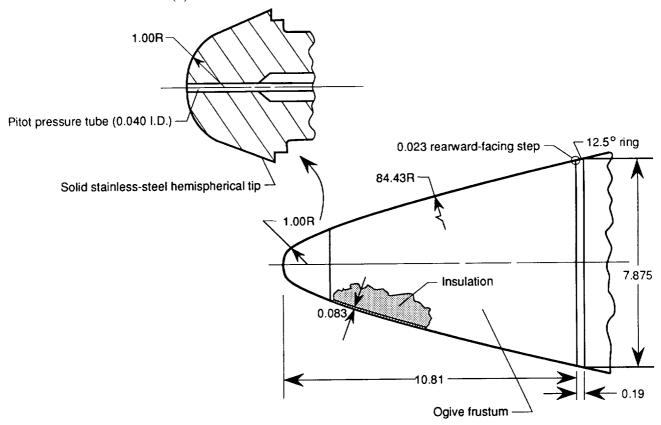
Schematic drawing of model assembly. Linear dimensions are given in inches.
